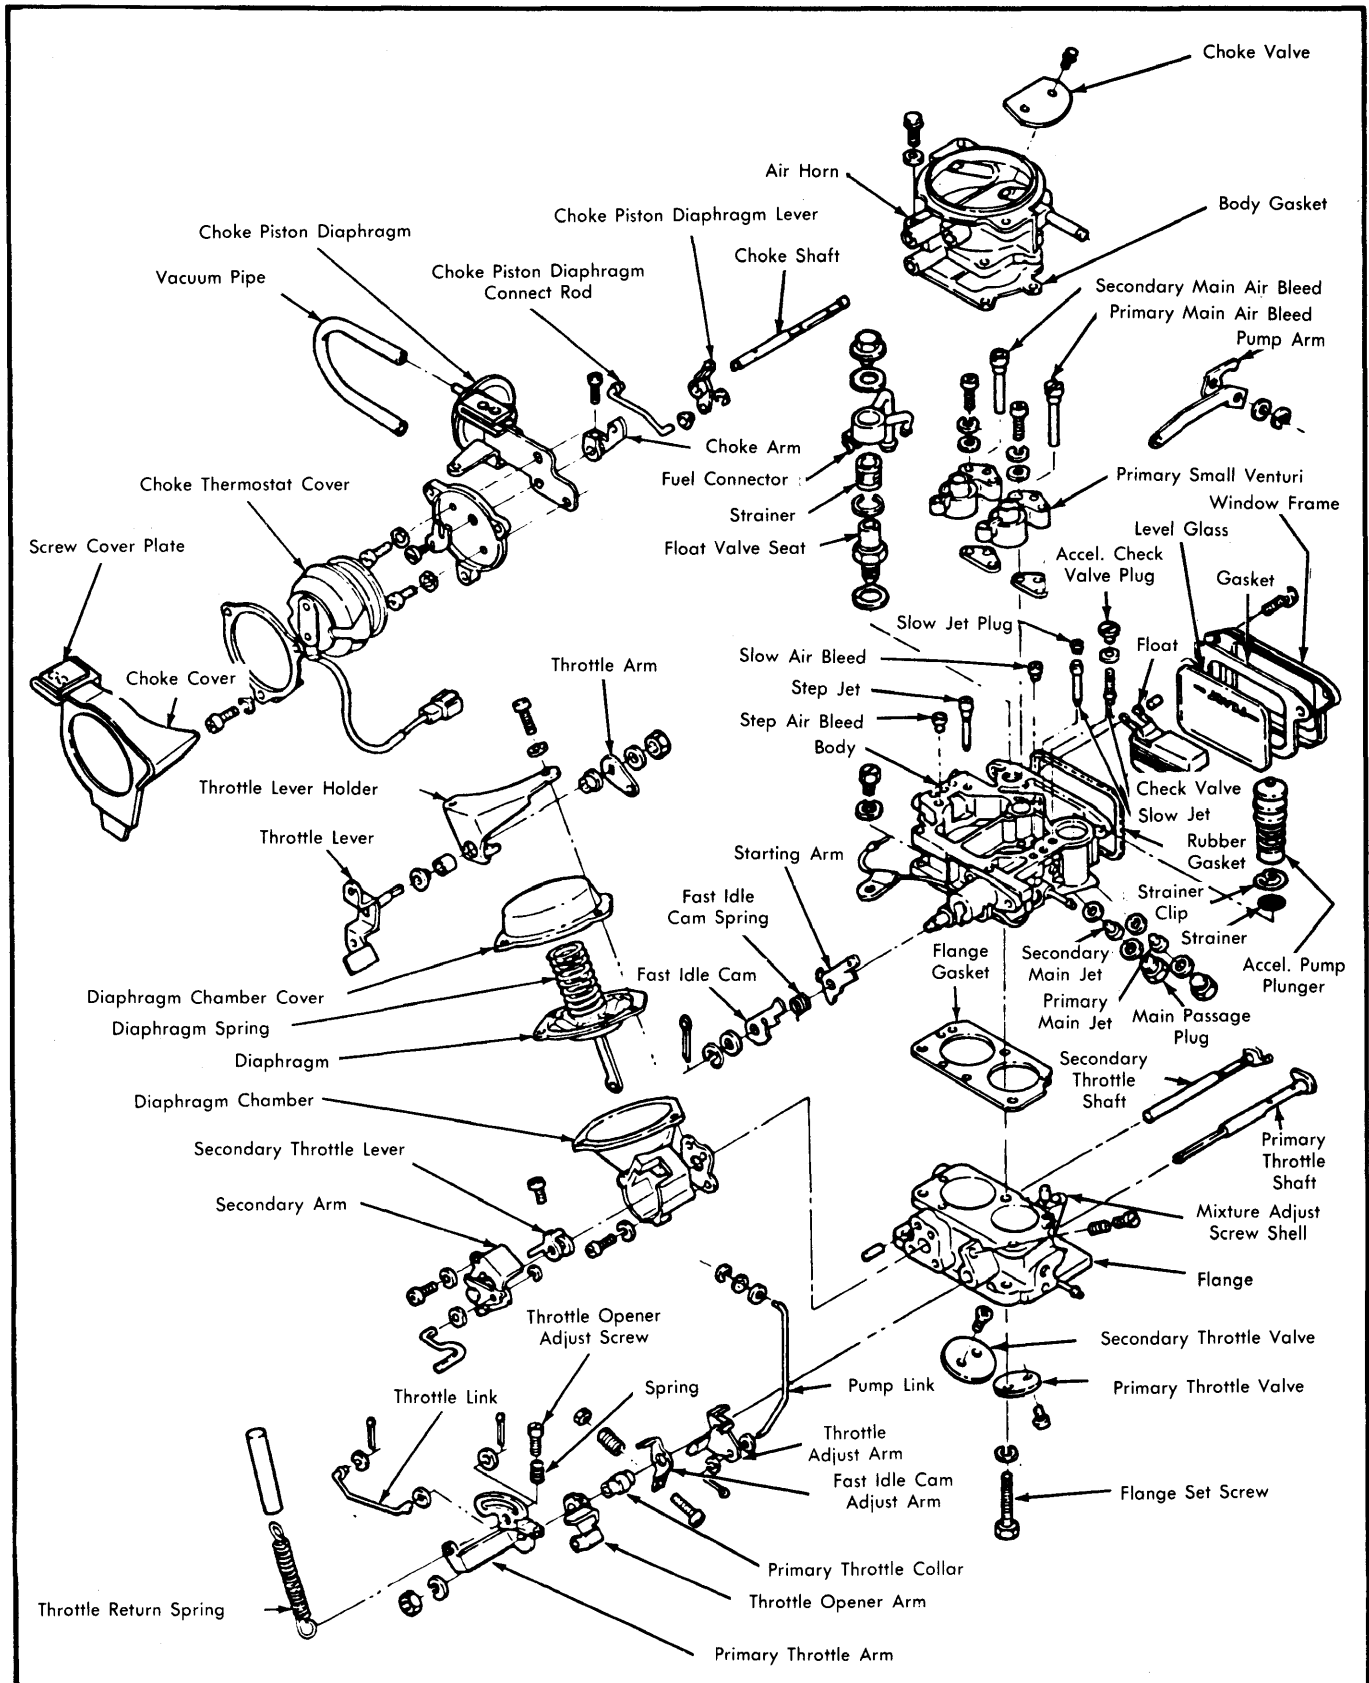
Exploded View of Hitachi DCS 328 2-Barrel Carburetor (Ford Courier 2000)
